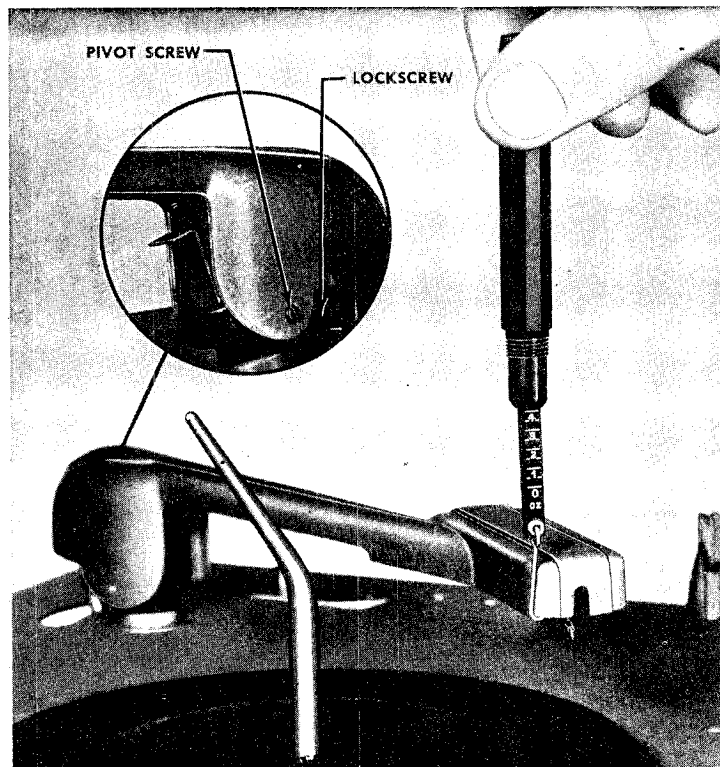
CHECKING TONE-ARM NEEDLE PRESSURE AND VERTICAL FRICTION
